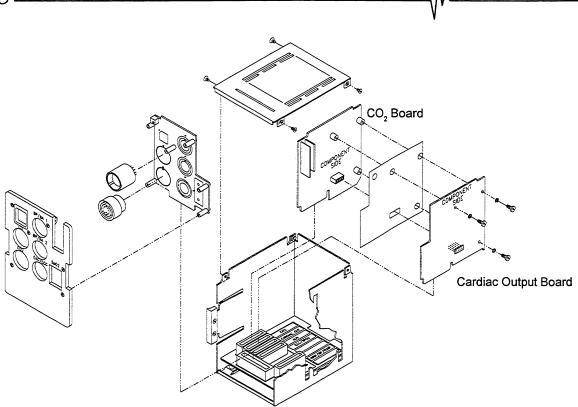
CO₂ with Cardiac Output Option - Exploded View
